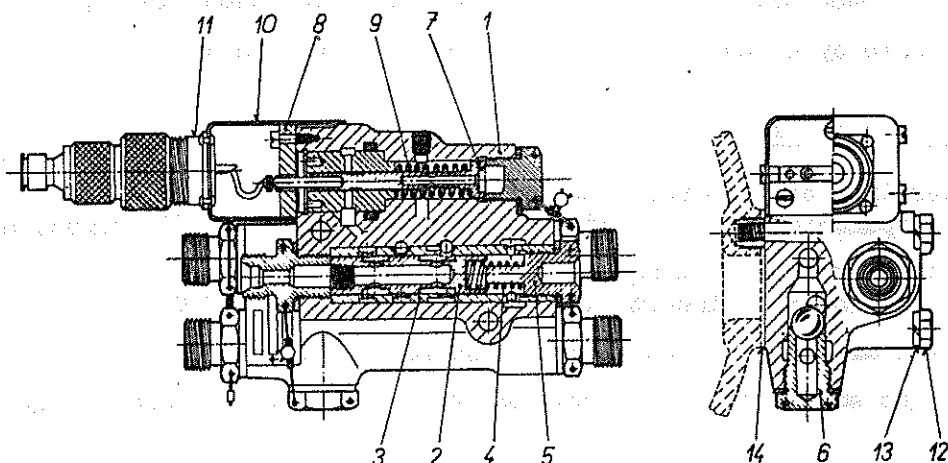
Section view of the LUN 7381 hydro-electric device
